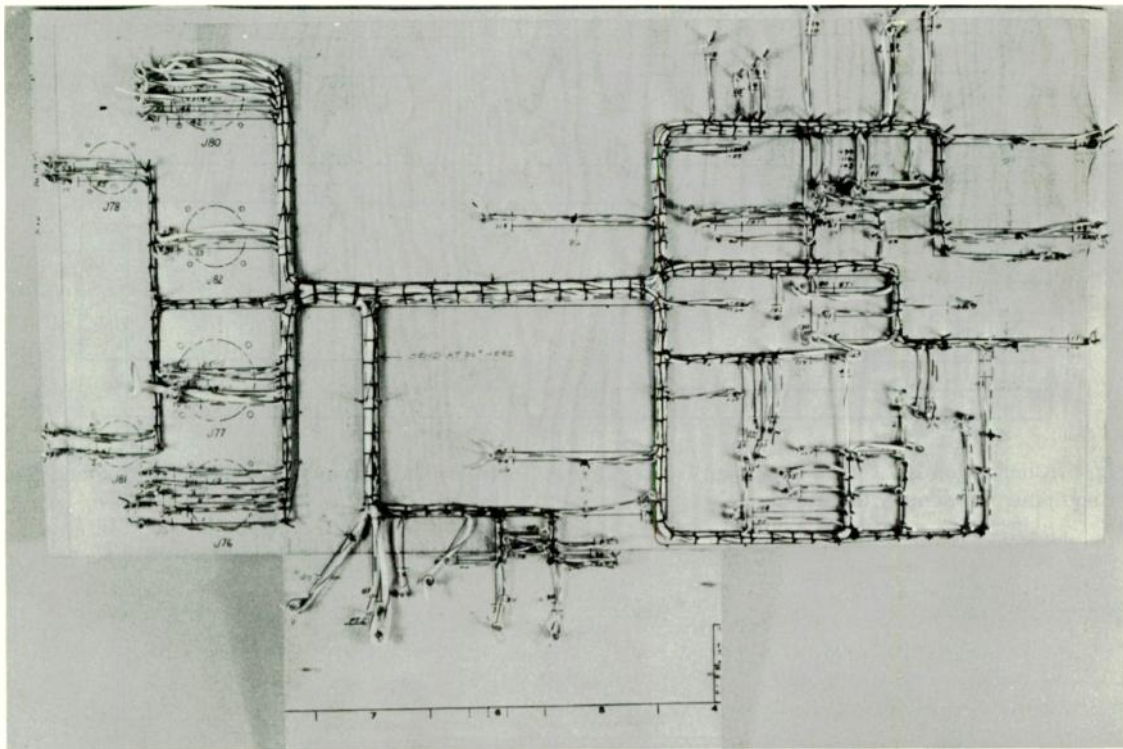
Pre-assembled harness assembly; note detail drawing in background.
